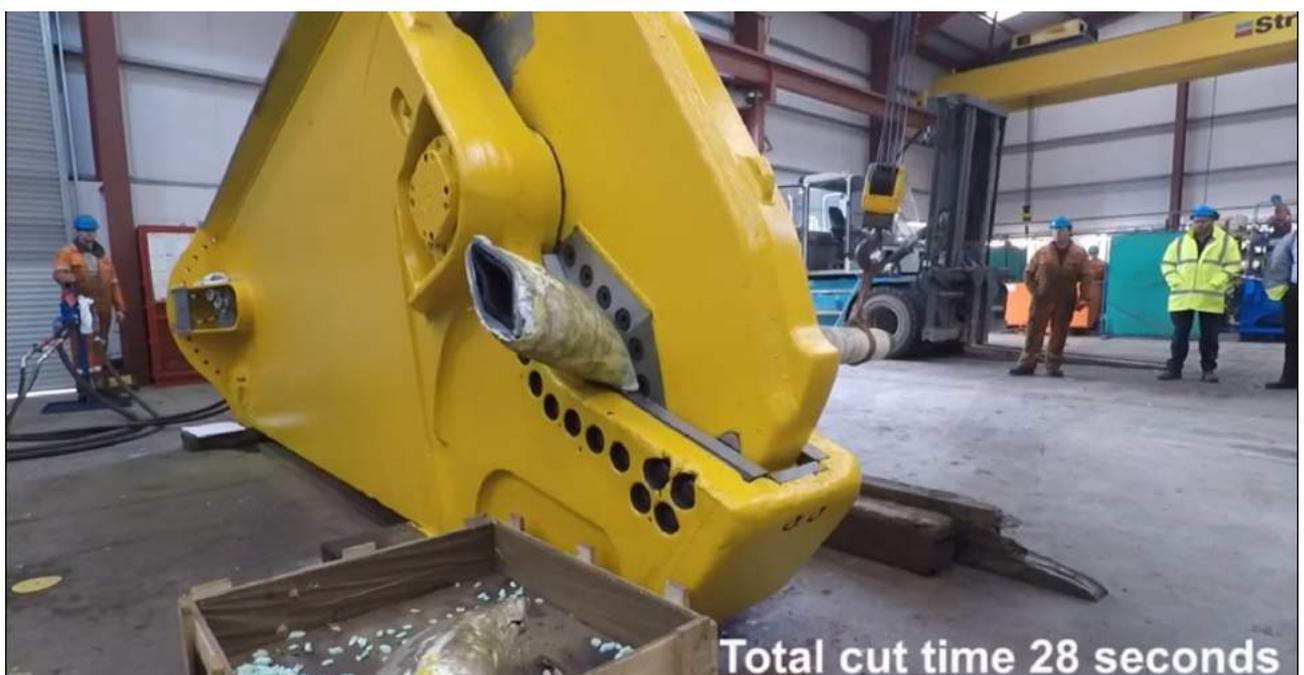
Shear Cutting Tool (James Fisher Offshore 2019)
